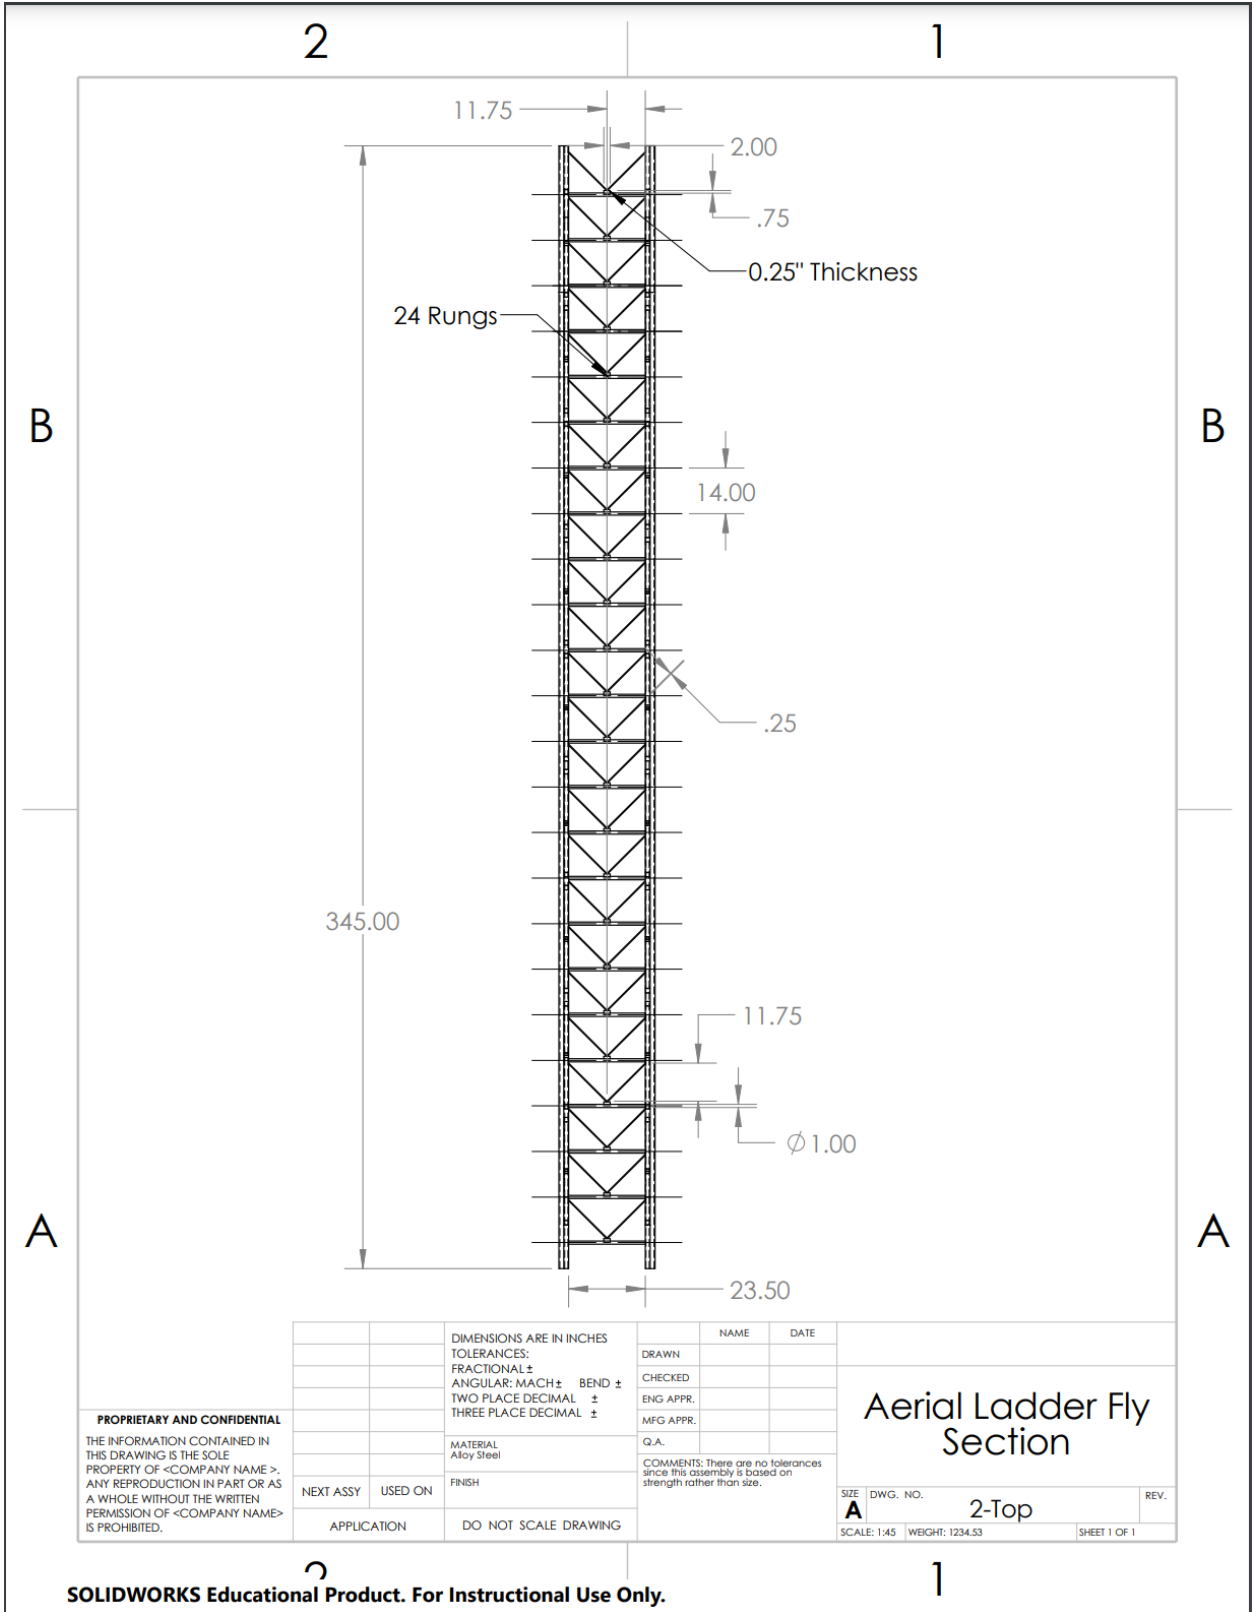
Top View of the Dimensioned Drawing of the Fly Section of the Aerial Ladder
